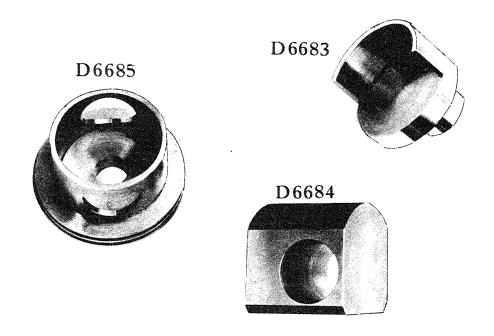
FIG. I. PHOTOGRAPH OF THE THREE TYPES OF TEST PIECE
